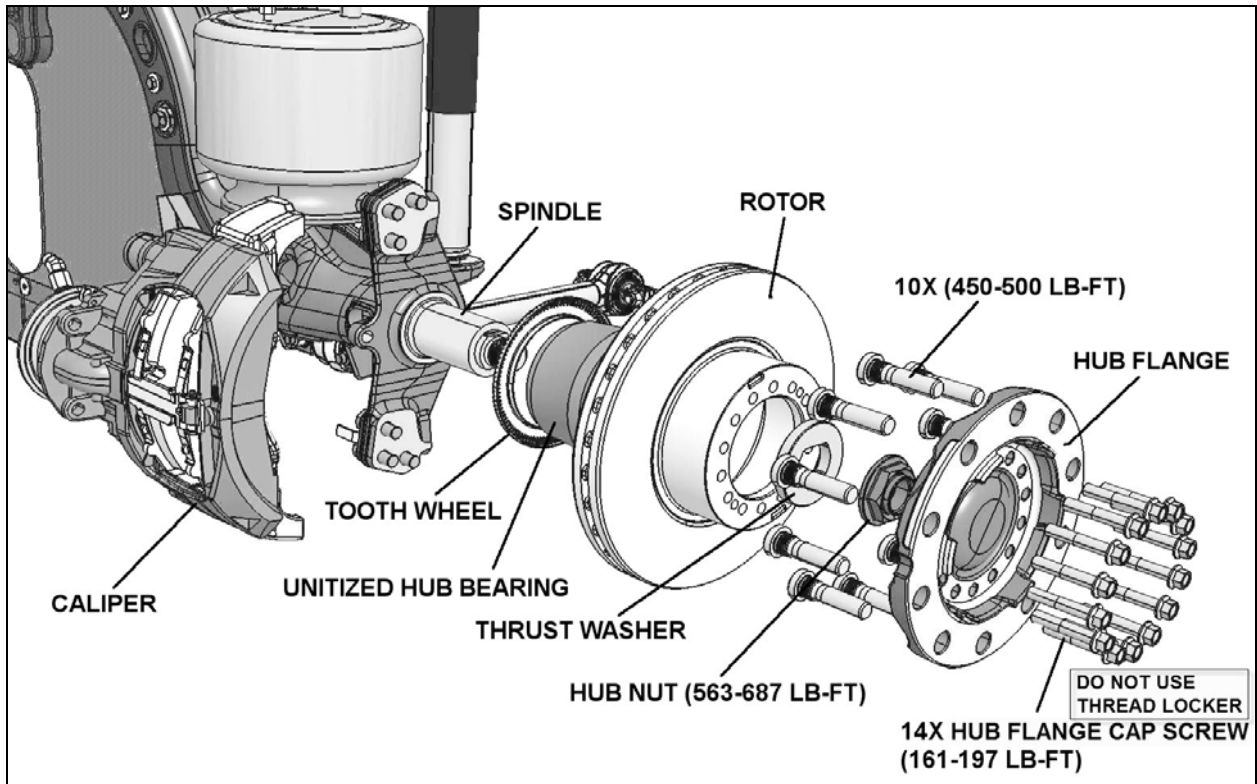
TAG AXLE HUB AND ROTOR ASSEMBLY
